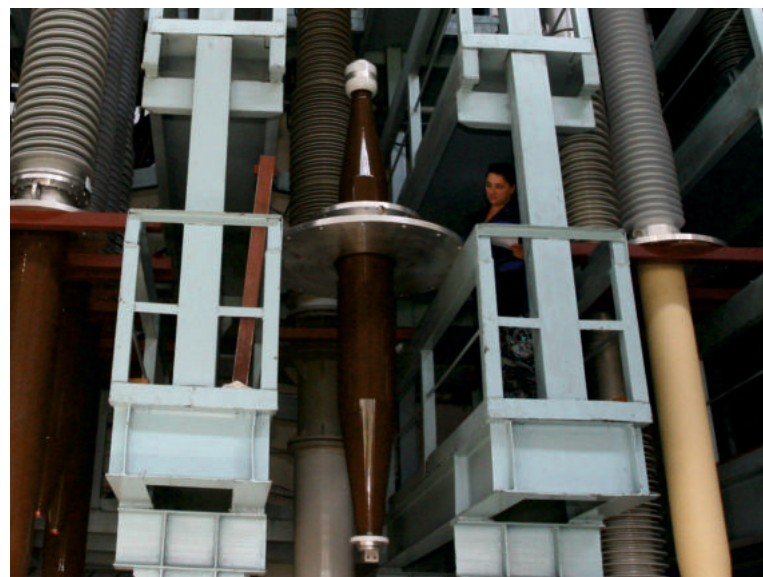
330 kV Oil - SF6 bushing (center) at the assembly shop of Izolyator plant
